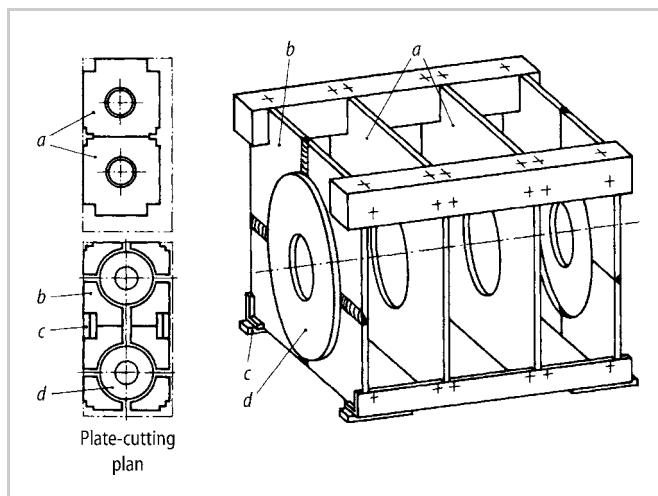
Electric motor housing. Welded construction with plate-cutting plan, after [7.162] (Siemens)
